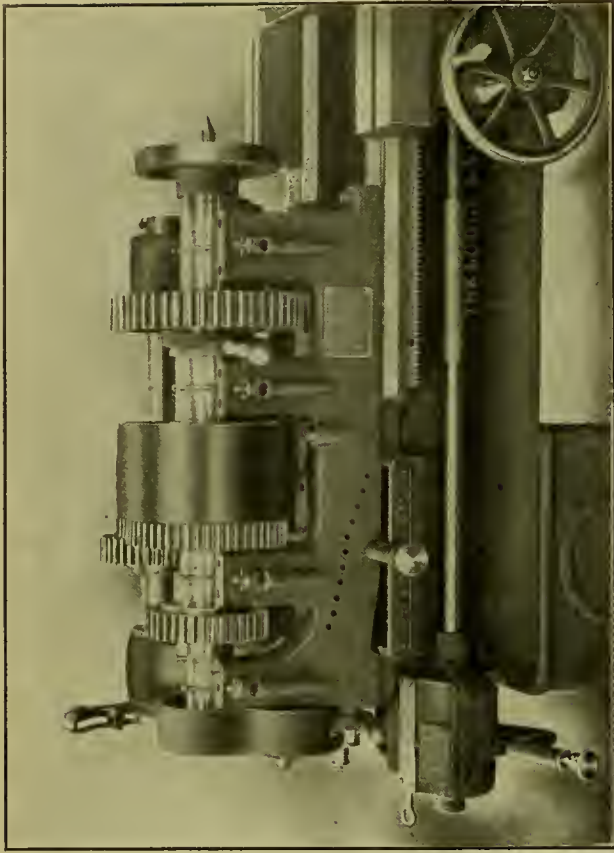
HEADSTOCK WITH BEARING CAPS REMOVED.
